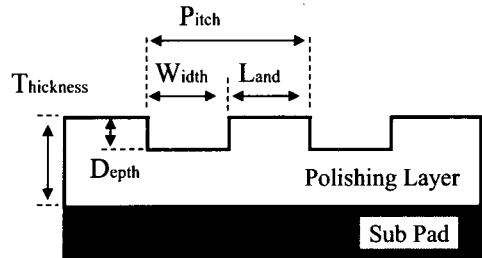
Cross section view of pad (Groove dimensions) width(w), depth(d), pitch(p)
